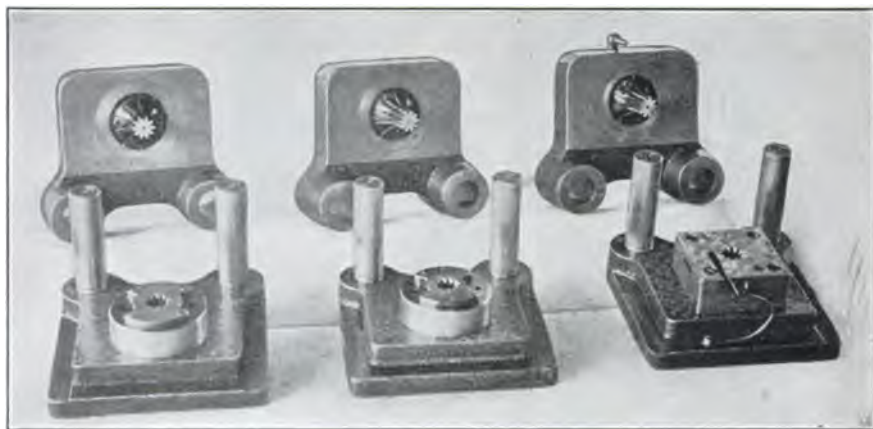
A set of dies for blanking, and shaving a small toothed wheel
